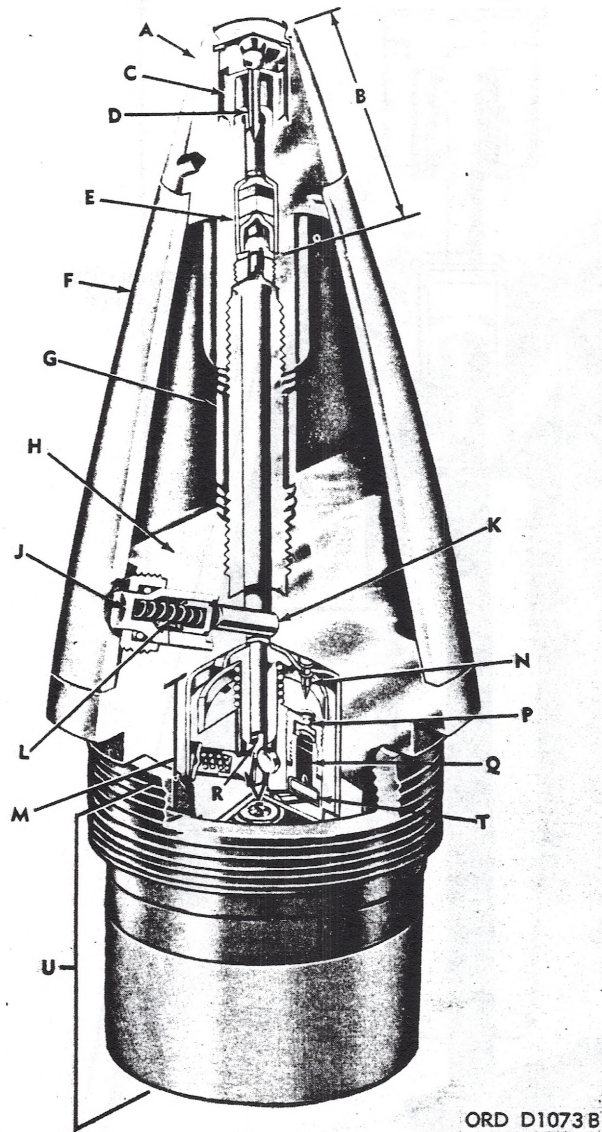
Fuze M78A1, Cutaway View Showing Unarmed Condition
